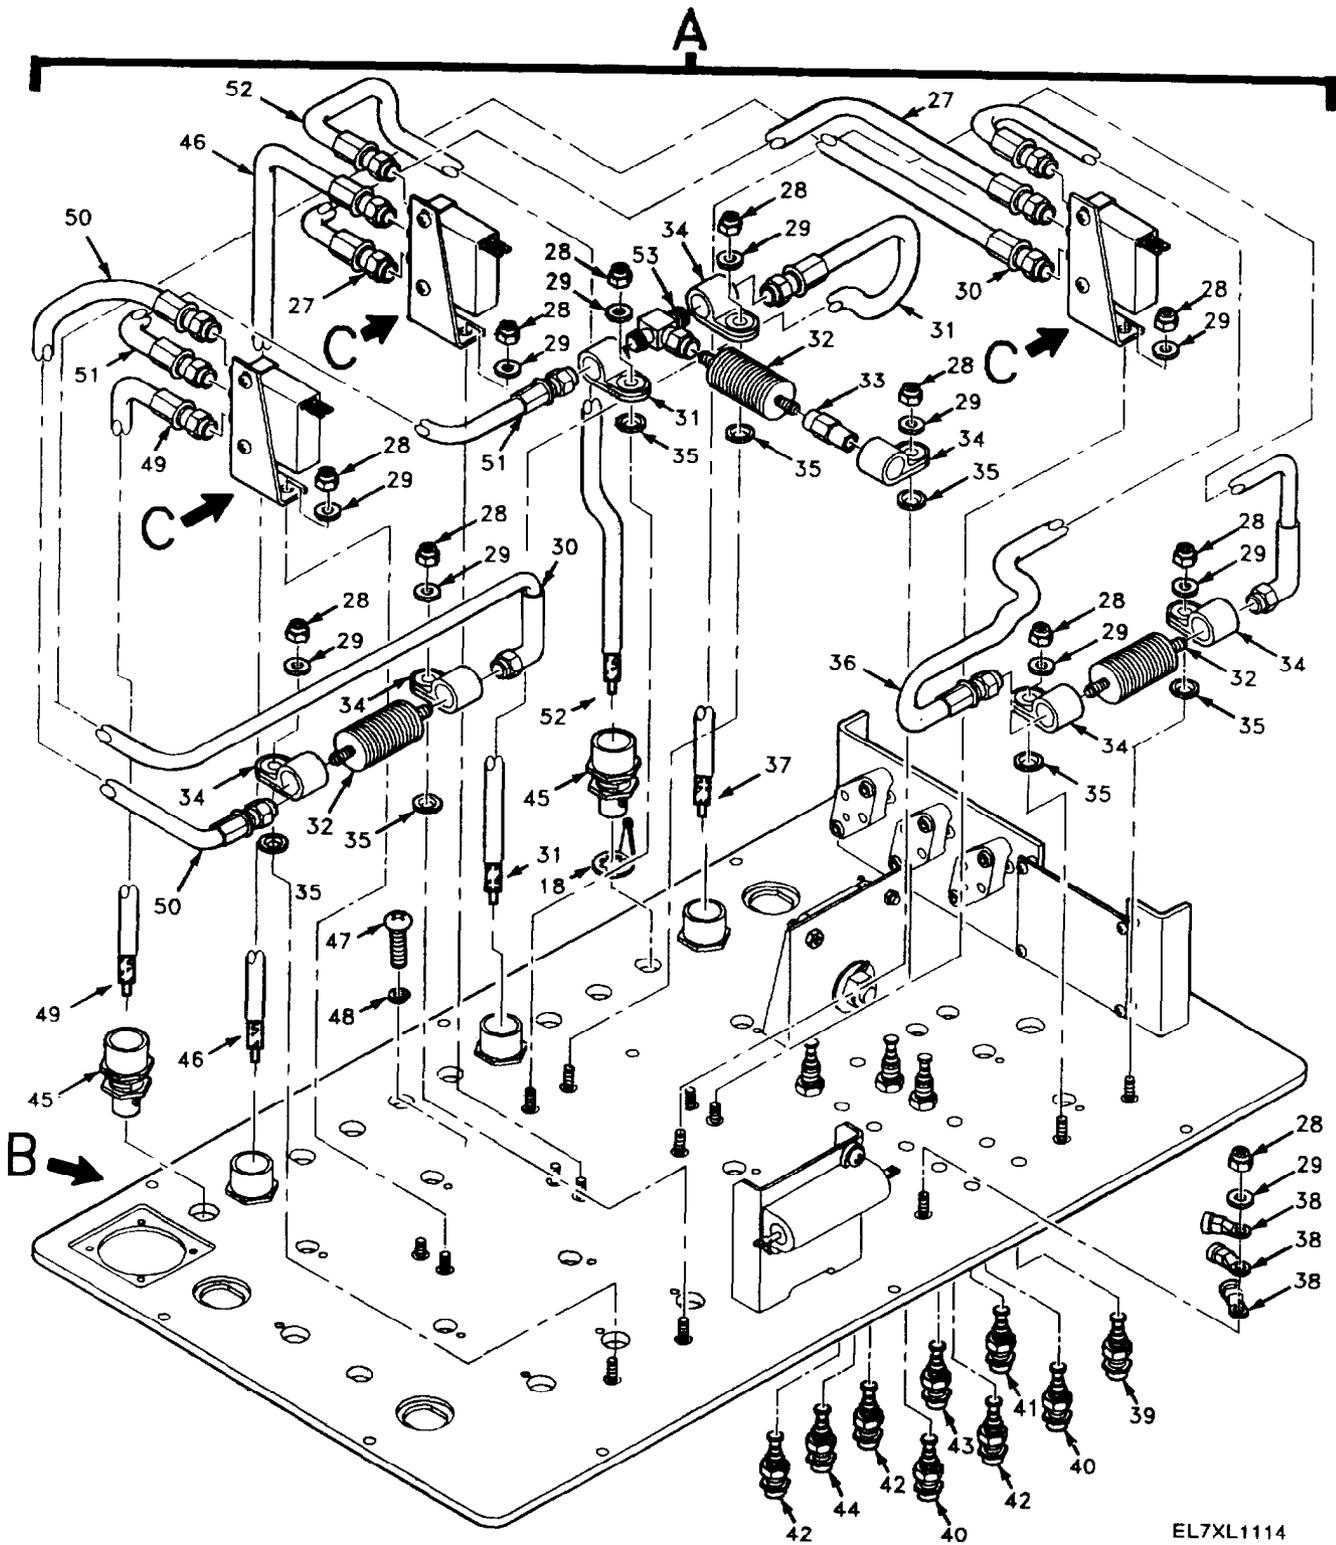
Test Adapter Front Panel Repair. (Sheet 2 of 3)
